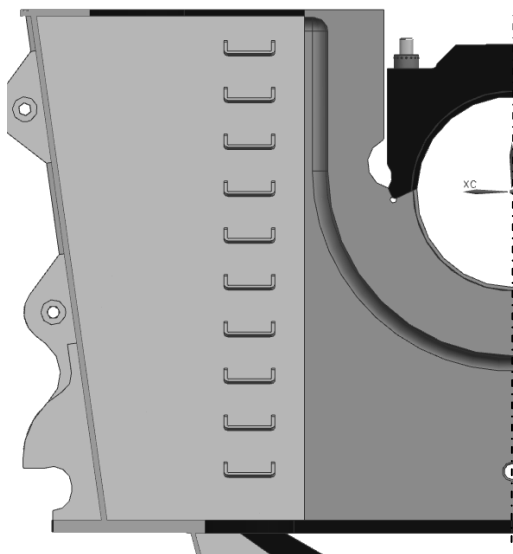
Section view of bottom part of engine section, showing the main bearing structure with bearing shell
